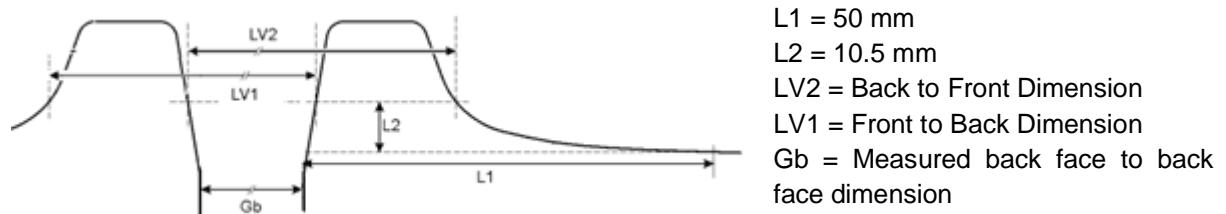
Configuration for Back of Flange to Front of Flange measurement
